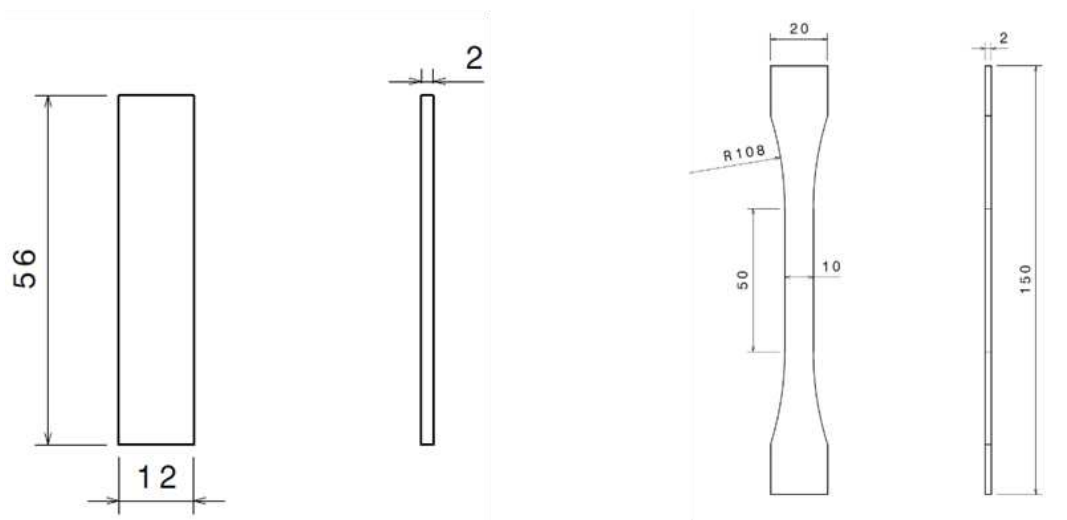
Sample shape and dimension for (Left) DMA and (Right) tensile testing
